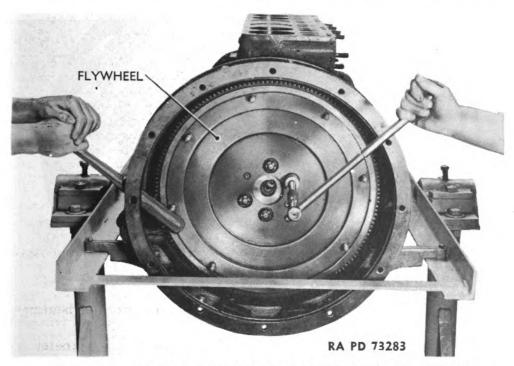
Removing Nuts from Crankshaft Flywheel Studs
